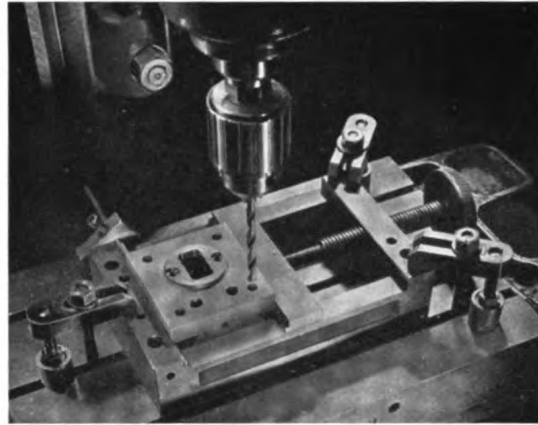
Special work-holding fixtures "pay off" in production Jig Boring.
